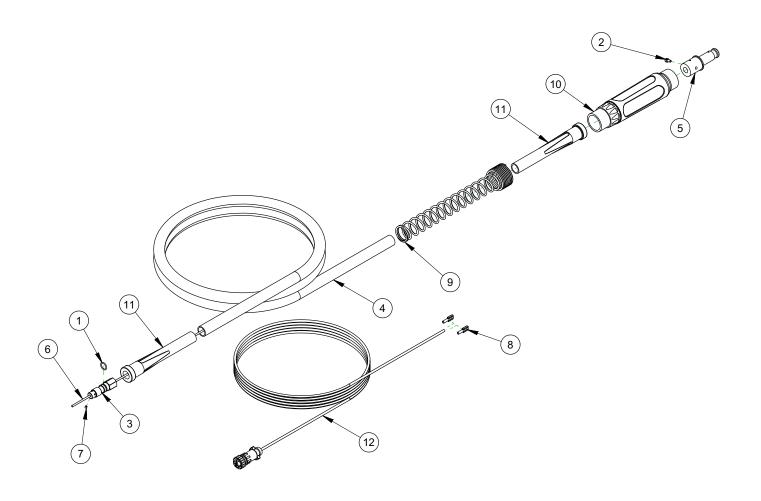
Contactor assembly for Hobart and Thermal arc (P/N 85530)
